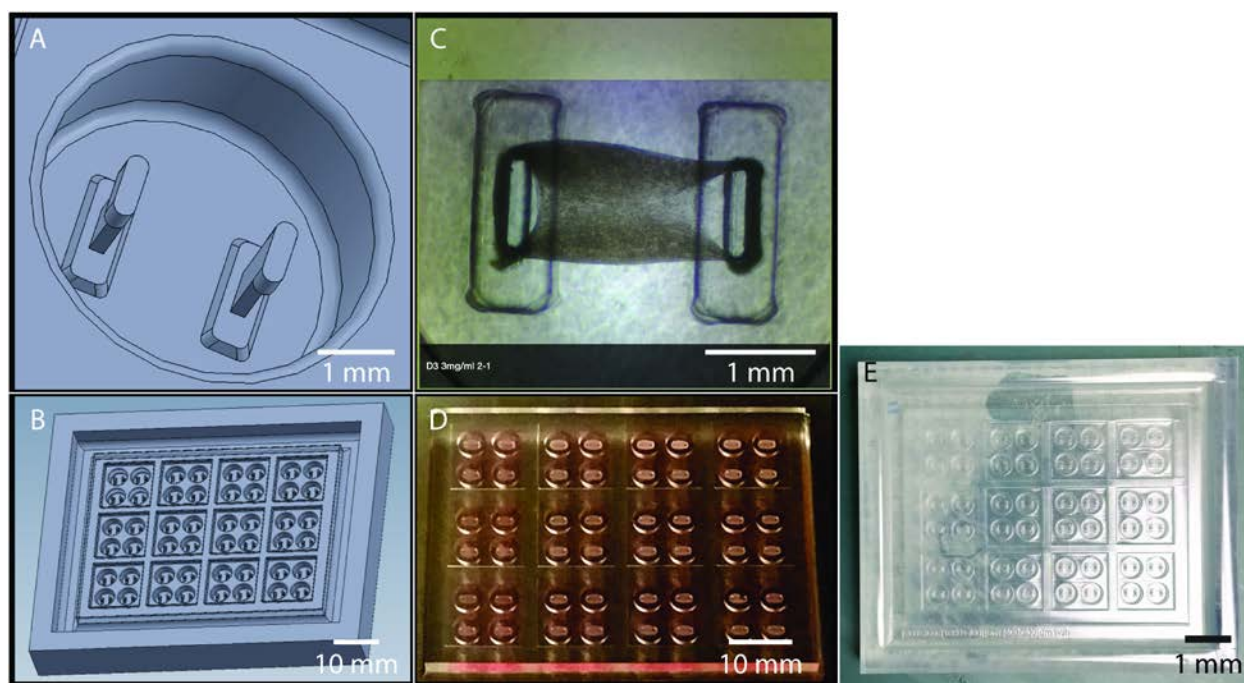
3D printed master mold using Viper Si2 and Aura60 resin.
